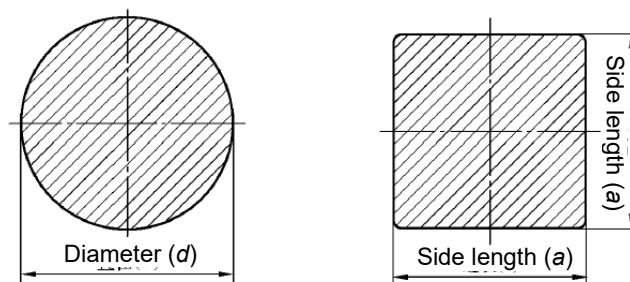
Schematic diagram of cross-section of hot-rolled round steels and square steels
